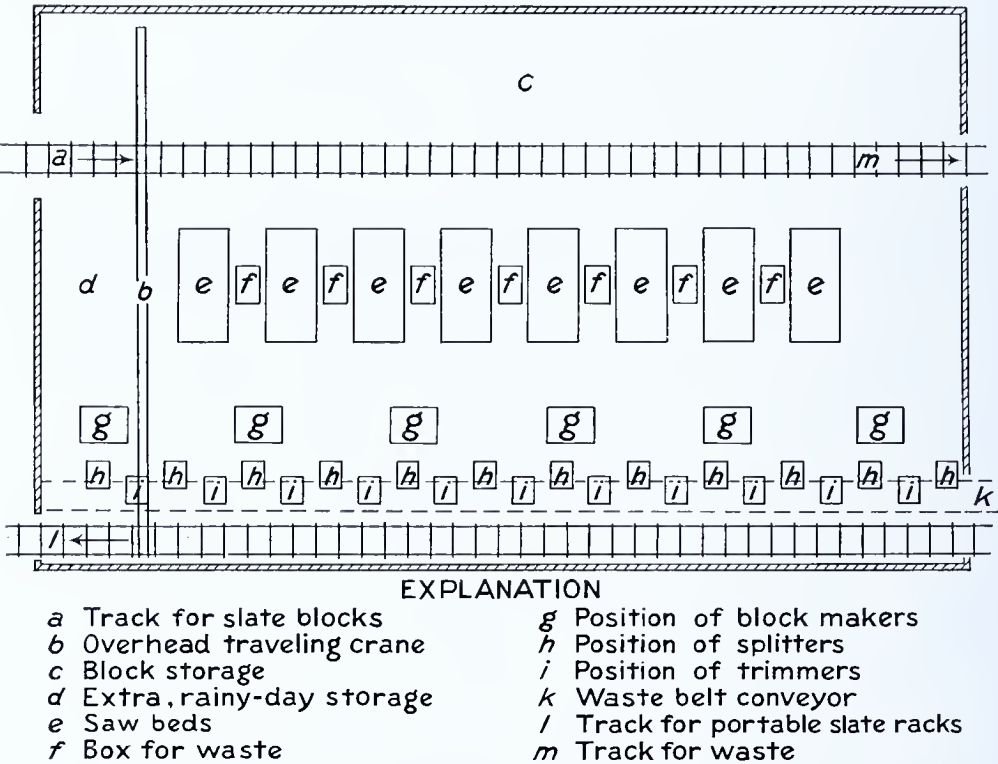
Plan of Jackson-Bangor Slate Company roofing mill (after Bowles).
